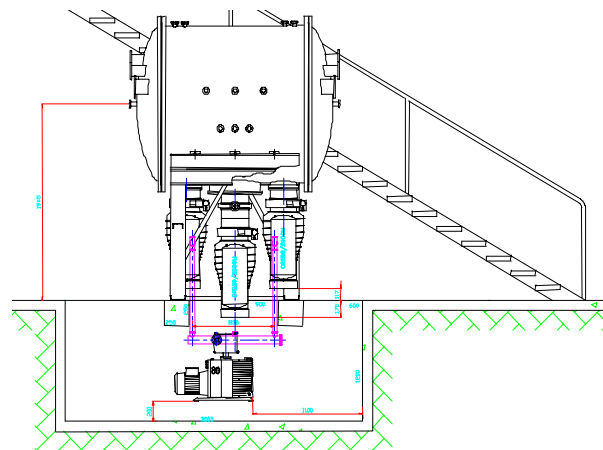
Schematic drawing of the vacuum apparatus showing the pumping system
